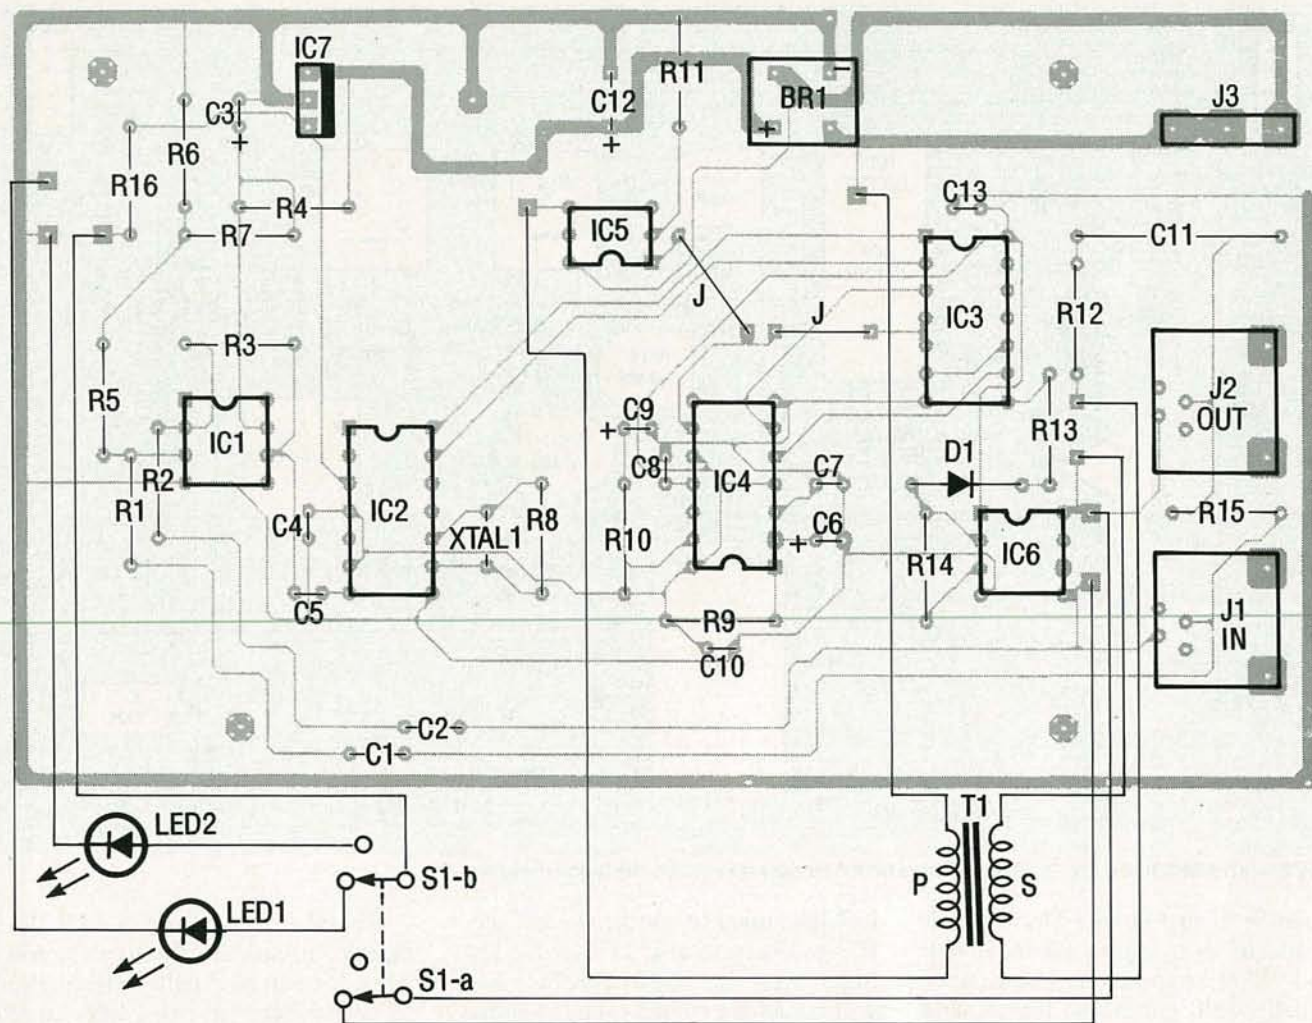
PARTS-PLACEMENT DIAGRAM. A similar layout can be used if you choose to use perfboard instead of a PC board.
